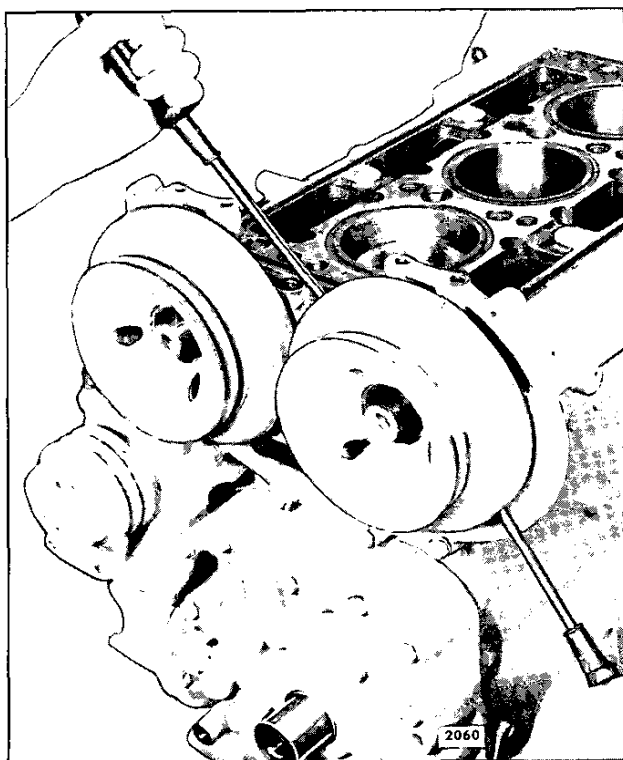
Removing Front Balance Weight (Pulley Type)
